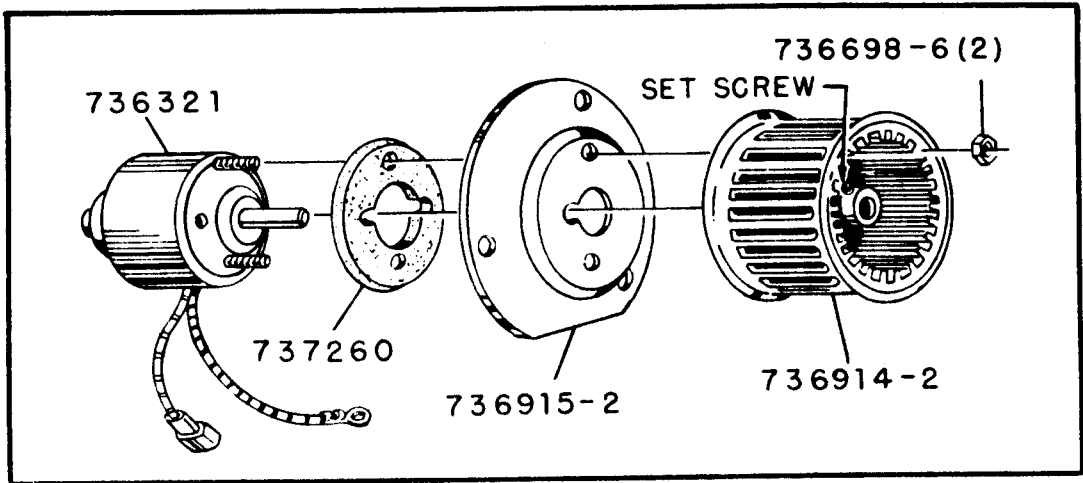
VENTILATING AIR BLOWER ASSEMBLY 736983-3
